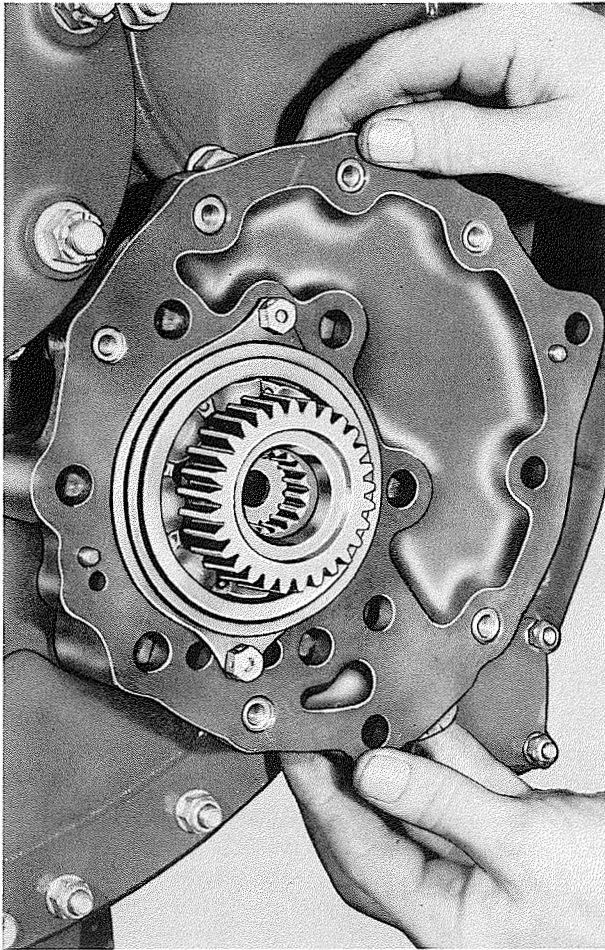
Removing Accessory Drive Gear Box Front Housing
